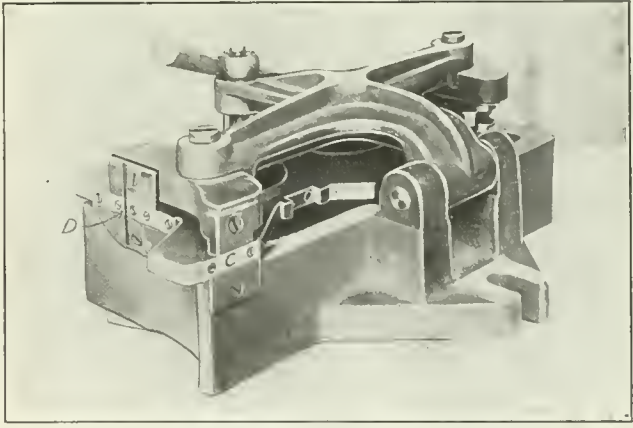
The First Milling Jig with Templet in Place for Setting Cutters
